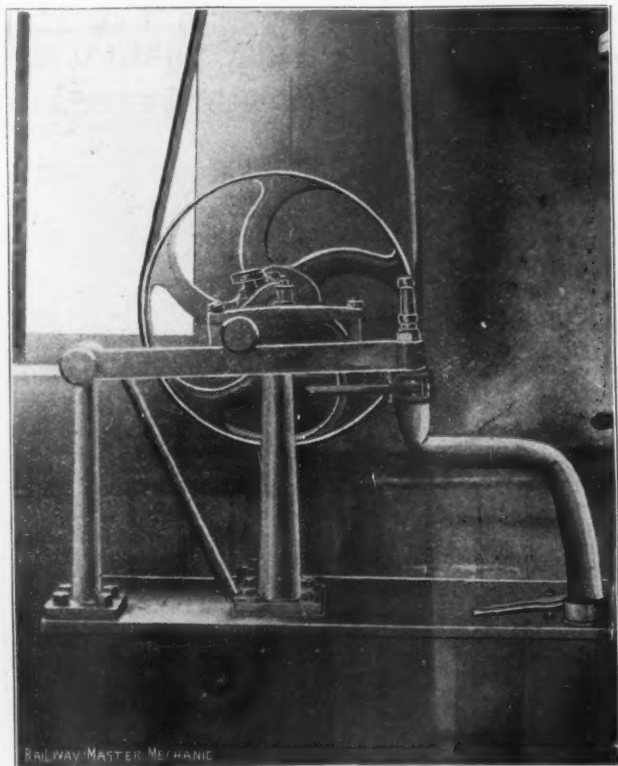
HOSE TESTING APPARATUS—N. & W. RY.
